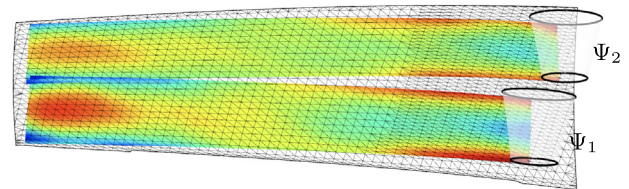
Challenge towards a single tool. Two milling paths of two different custom-shaped tools Ψ_1 and Ψ_2 on one flank of a spiral bevel gear, cf. Fig. 1(a), are shown [42]. The milling strips are color-coded by the signed distance to the reference surface (wire-frame). Our objective is to optimize the tool and the path towards a single conical tool and G^1 -continuous envelopes. (For interpretation of the references to color in this figure legend, the reader is referred to the web version of this article.)
